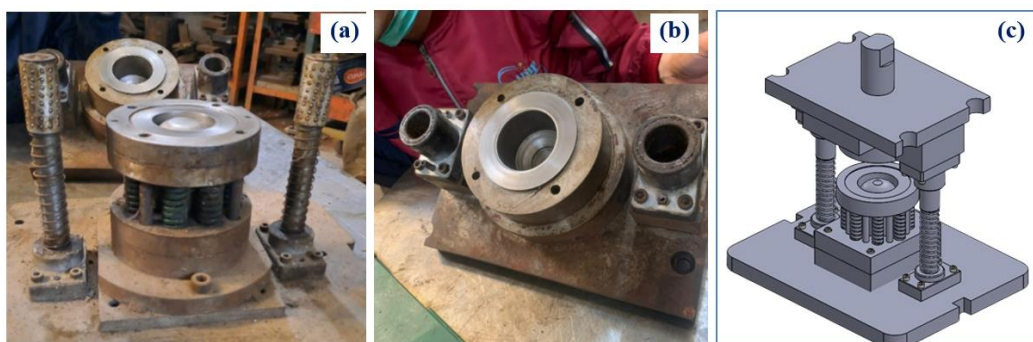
The Dies and Punch of Cup drawing: (a) Dies, (b) Punch, and (d) SolidWork Design.
